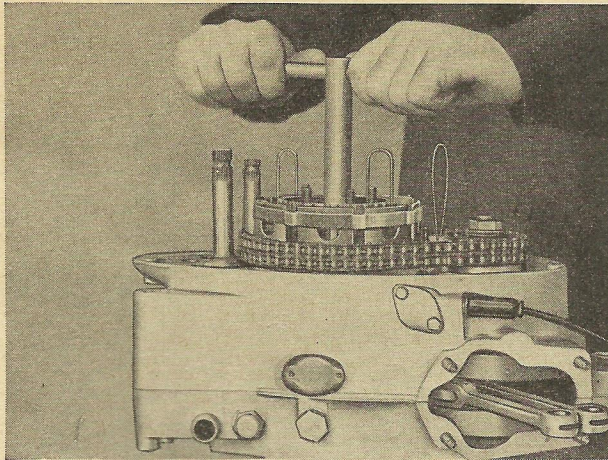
Dismantling the clutch Unscrewing the hub locking screw
